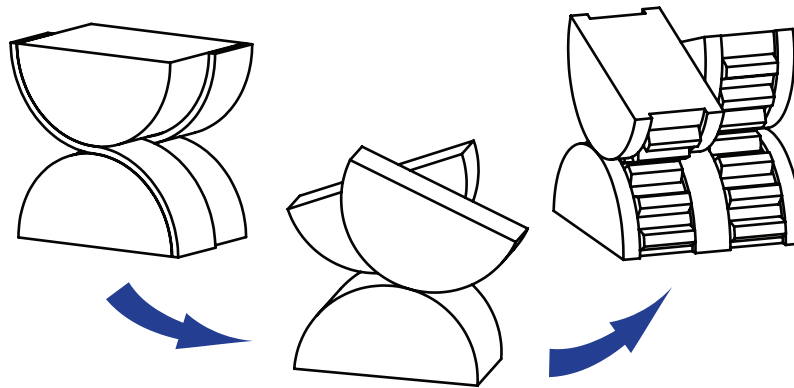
An illustration showing the similarities and distinctions between the traditional CORE joint (left) and the split CORE joint used in the gripping mechanism design (right).
